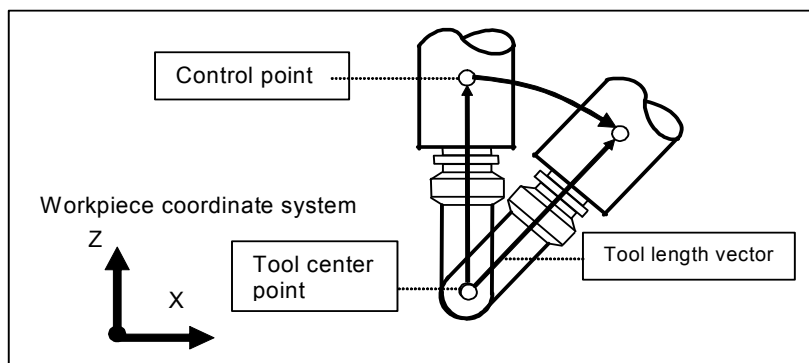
(a) Operation of tool center point retention type tool axis direction control (tool rotation type)
